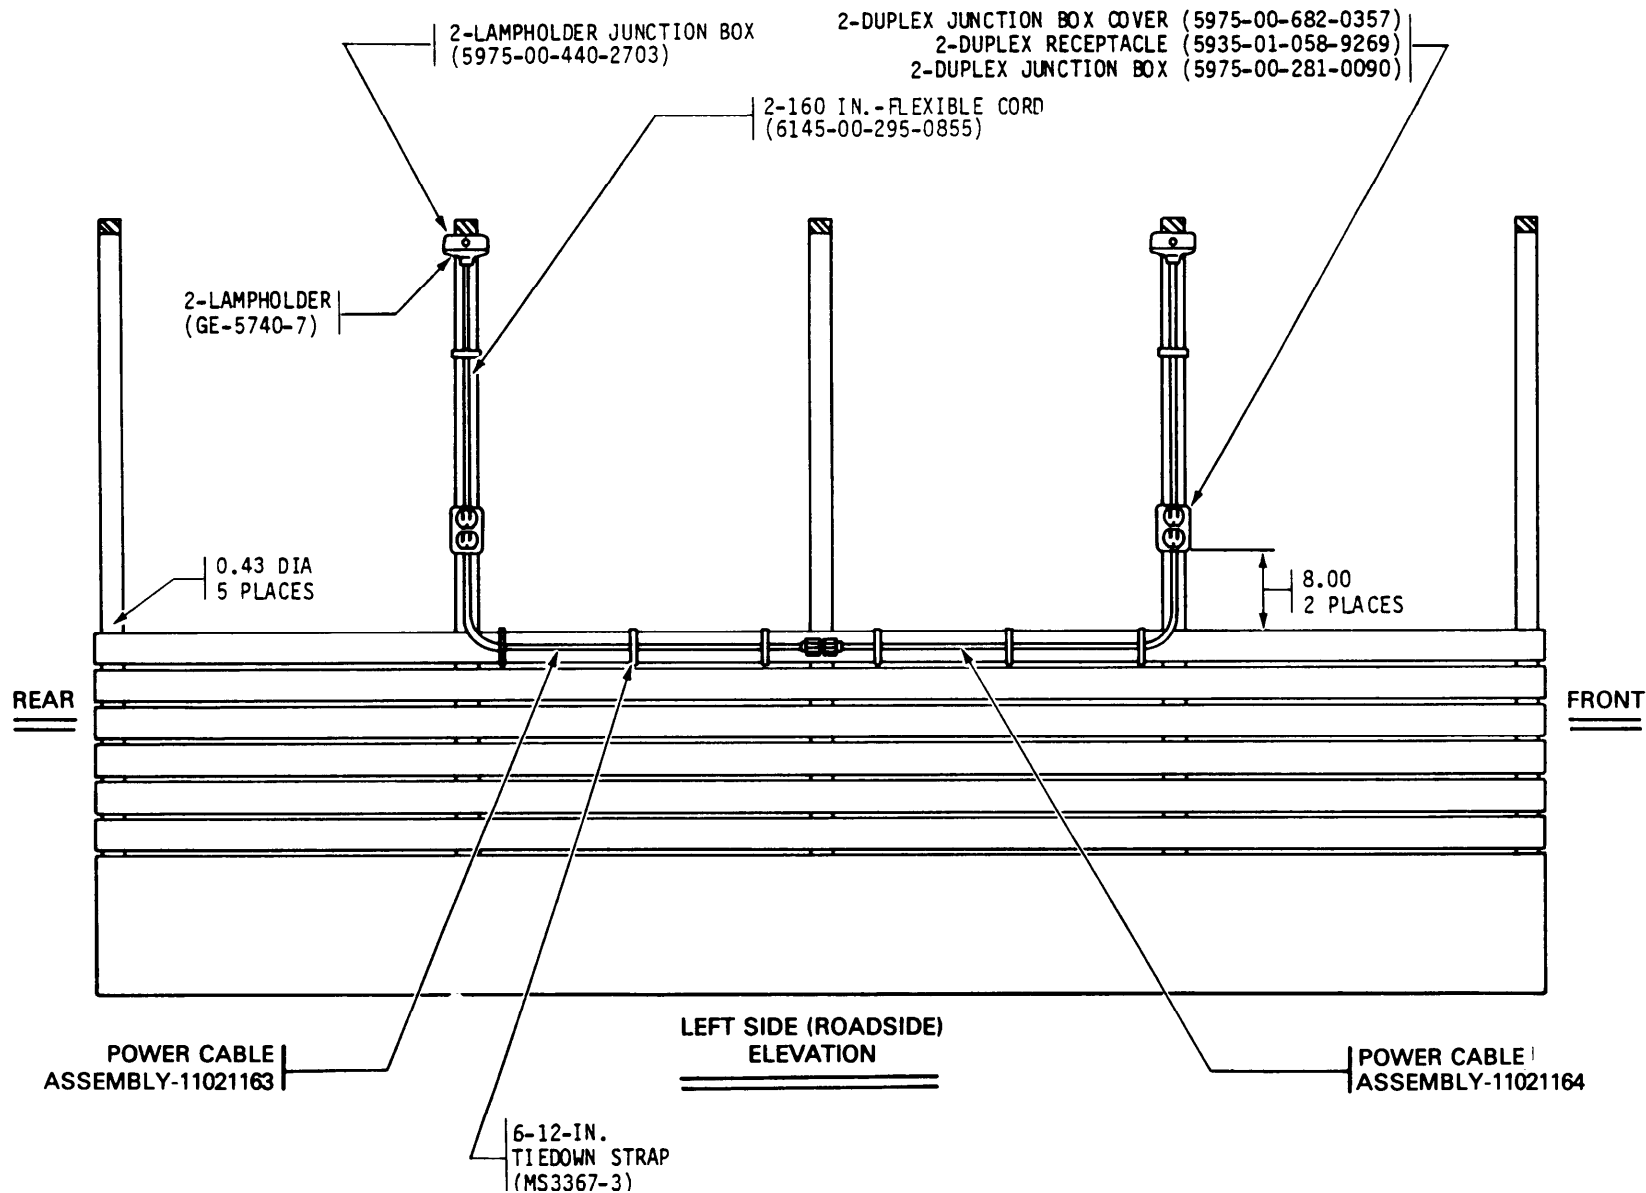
Electrical Components to be Mounted, Unit 1, M35A2, Left Side Elevation.
